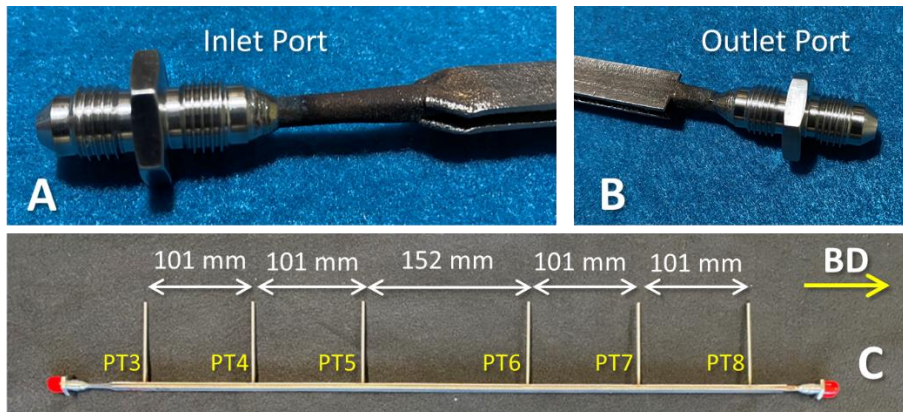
Channel fabrication of inlet/outlet ports and instrumentation. A) Inlet port welding, B) Outlet port welding, C) Welding of the instrumentation tubes for pressure transducers. Build direction denoted as BD.
